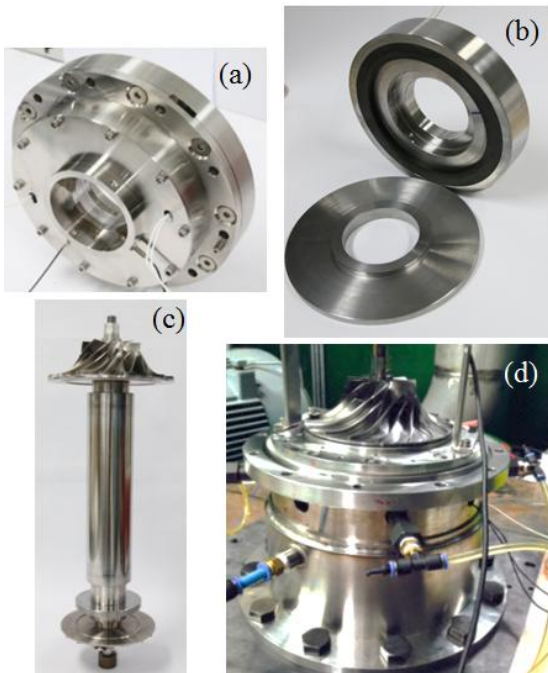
Manufactured components (a) radial magnetic bearings, (b) thrust magnetic bearing, (c) rotor with impellers, (d) assembled turbo compressor
